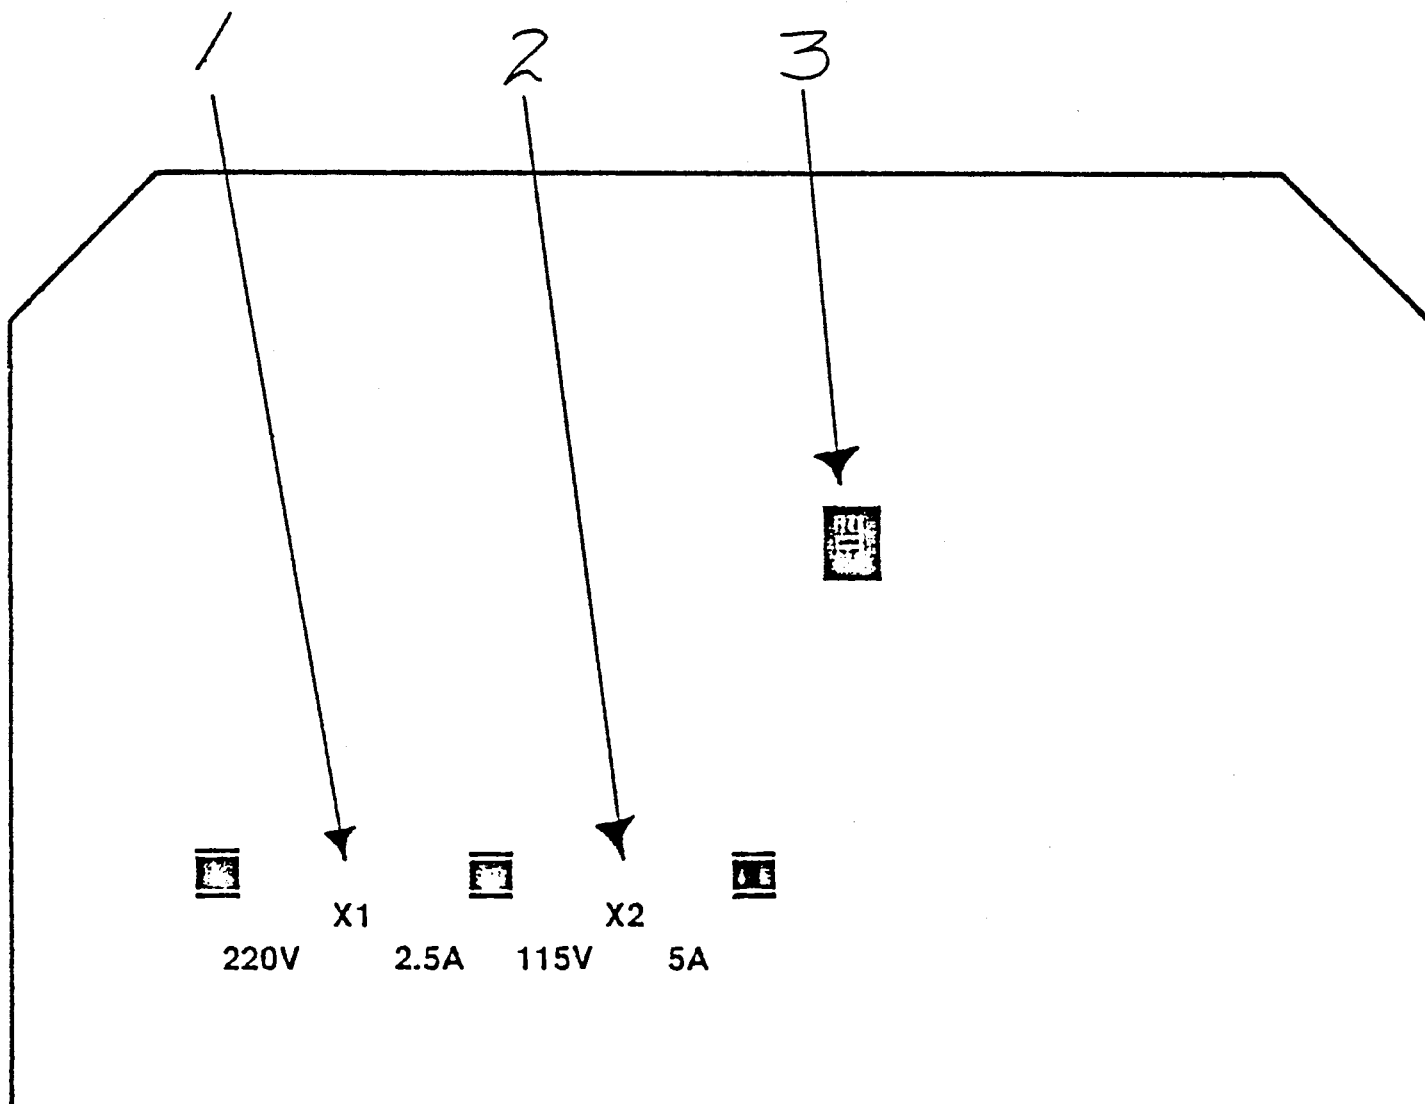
is an illustration of the 2621P power supply, 02620-60019. The numerals indicate important parts of this assembly.
